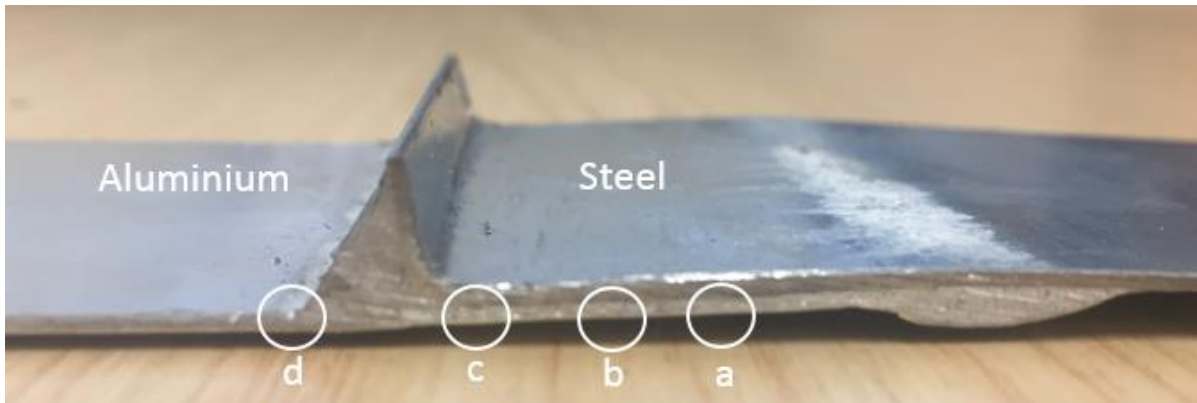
the position of the investigated sections in the aluminium-to-steel welded joints for the metallurgical analysis.
